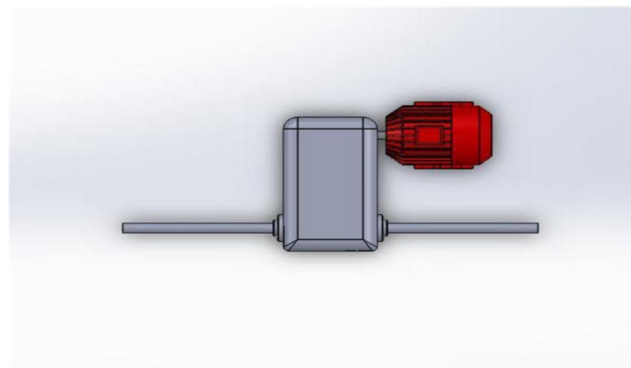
Gear Box Assembly in Solid Works for Transmission System
